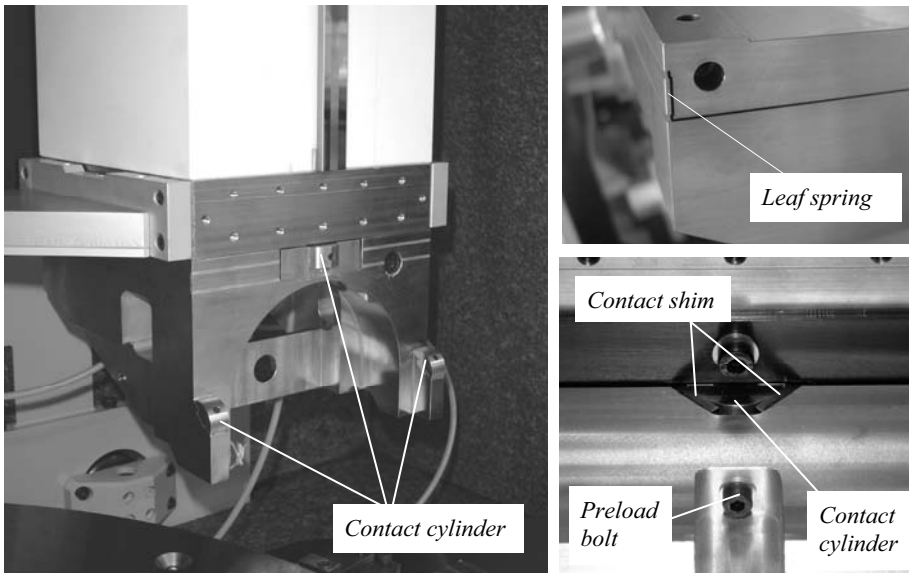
$\Psi$ -axis mount (left), leaf spring (top right) and shim adjustable V-groove contact (lower right)
